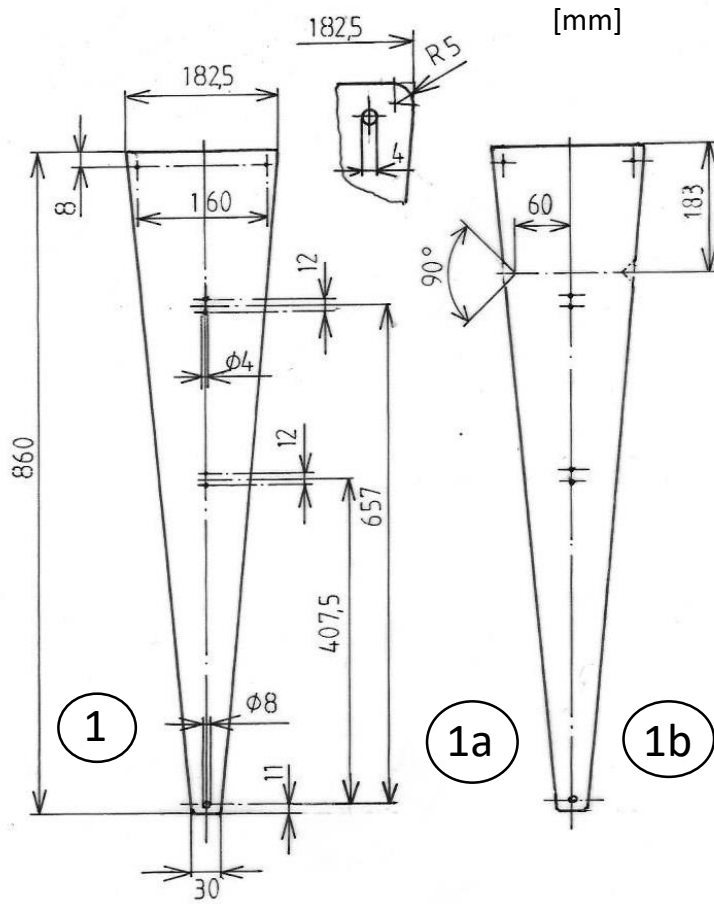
Reflector Sheet (1) without lateral cutouts, (1a) with cutout on the left, (1b) with cutout on the right; rounding corners of pressed kit with flat file
